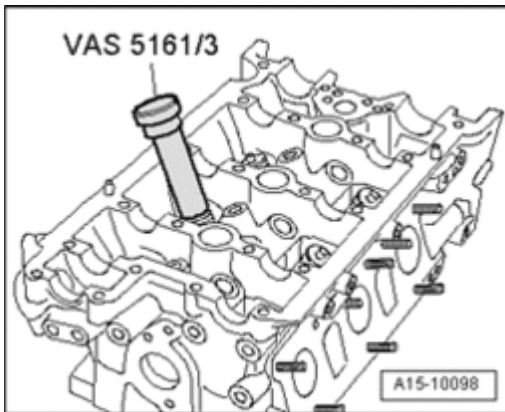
Placing Drift VAS 5161/3 On Valve Spring Plate And Loosening Stuck Valve Keepers Using Plastic Hammer
